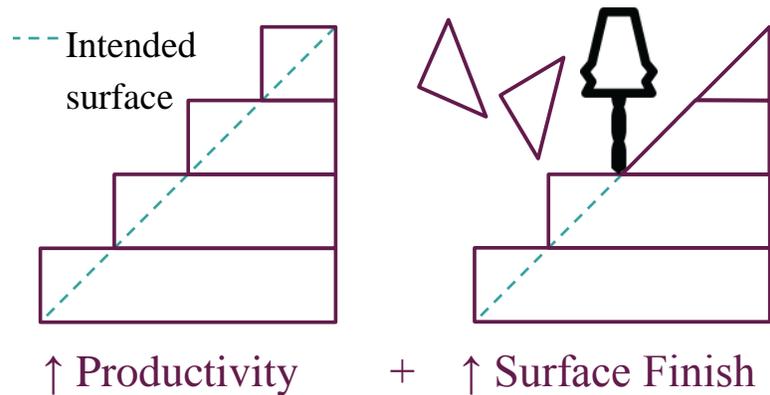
Cross-sectional view showing how an overbuilt part can be machined using the combination of AM and CNC machining [21].
